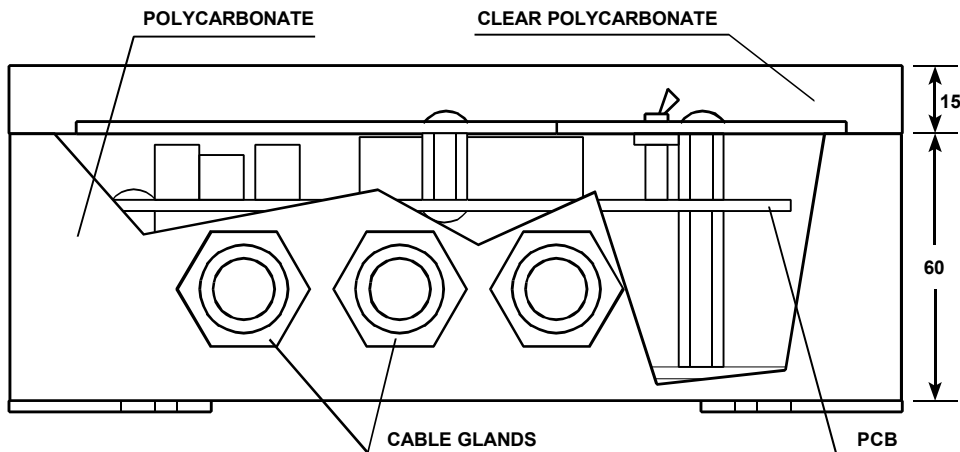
Enclosure bottom view showing gland positions and internal arrangement
